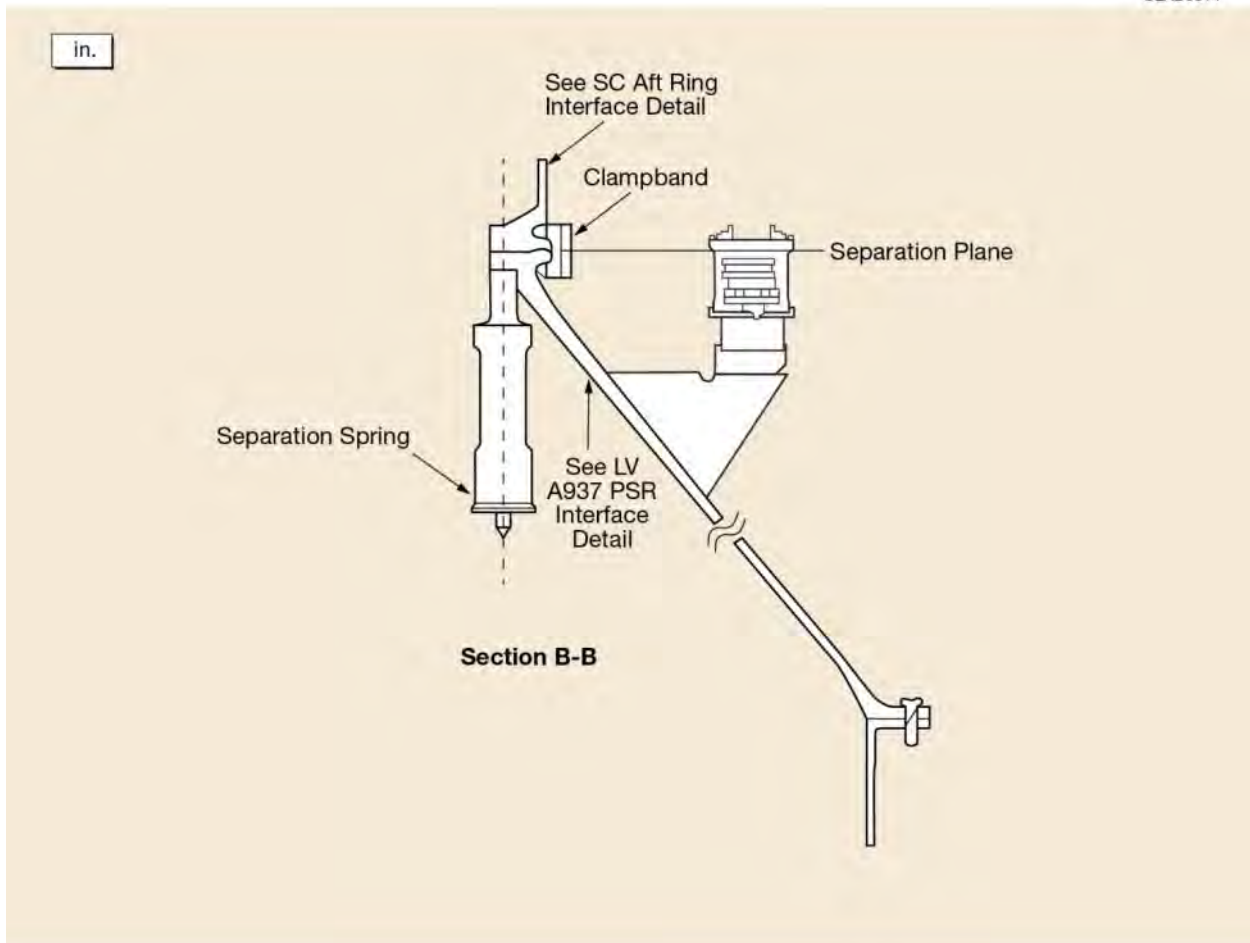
A937 PLA Separation Spring Assembly and Electrical Connector Bracket
